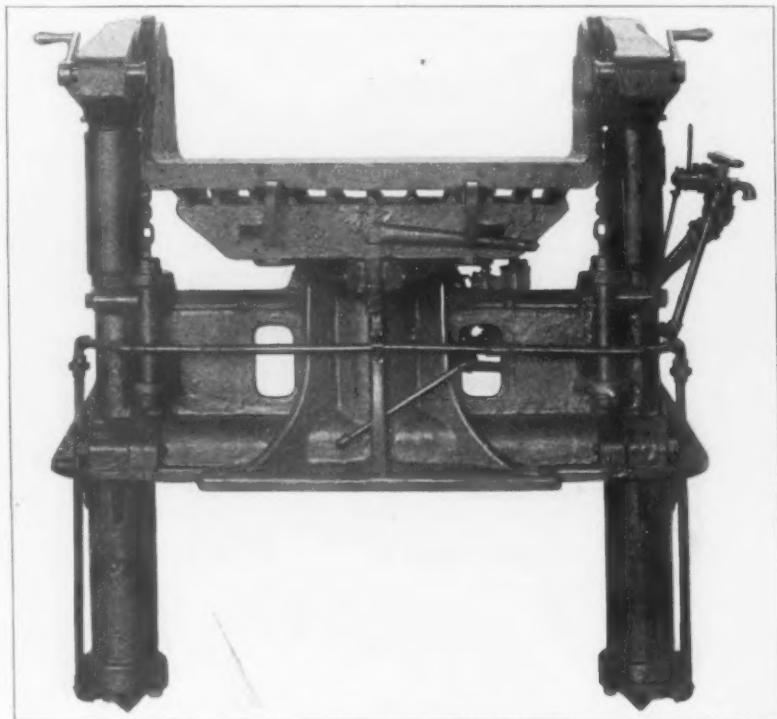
A Machine with Parts Cast Separately, Entailing Unnecessary Machining
